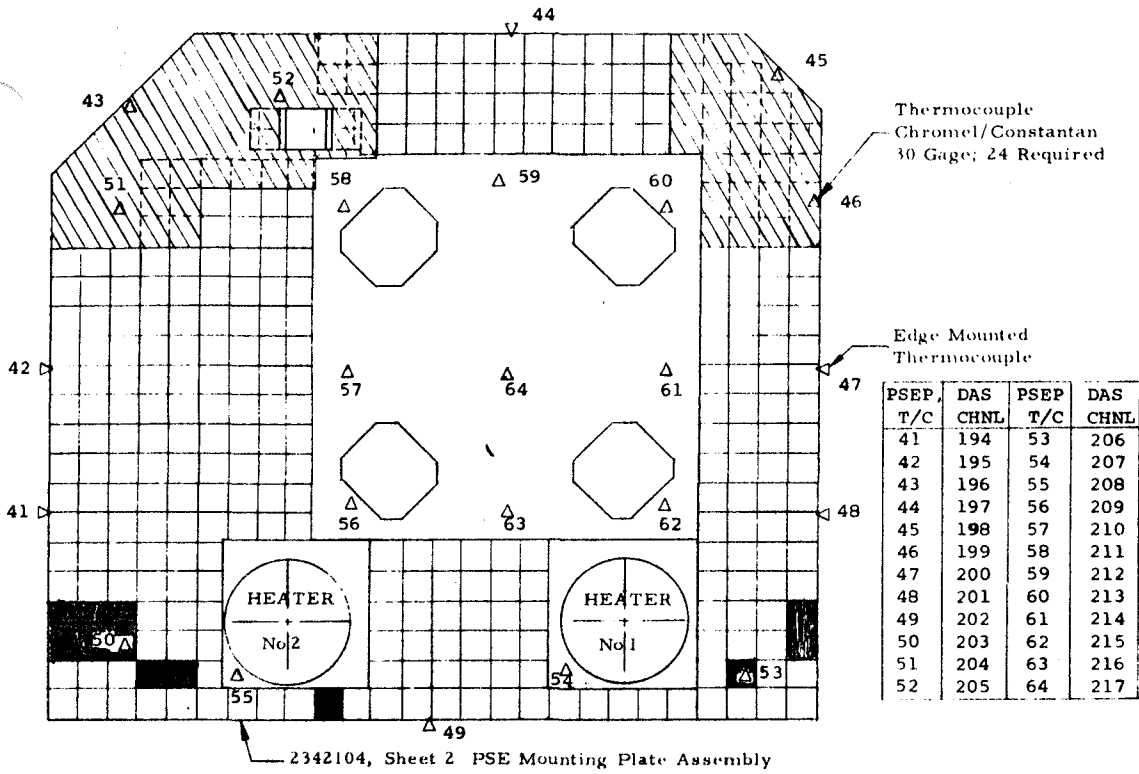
Thermocouple Locations (41-64) - PSEP PSE Mounting Plate Assembly
